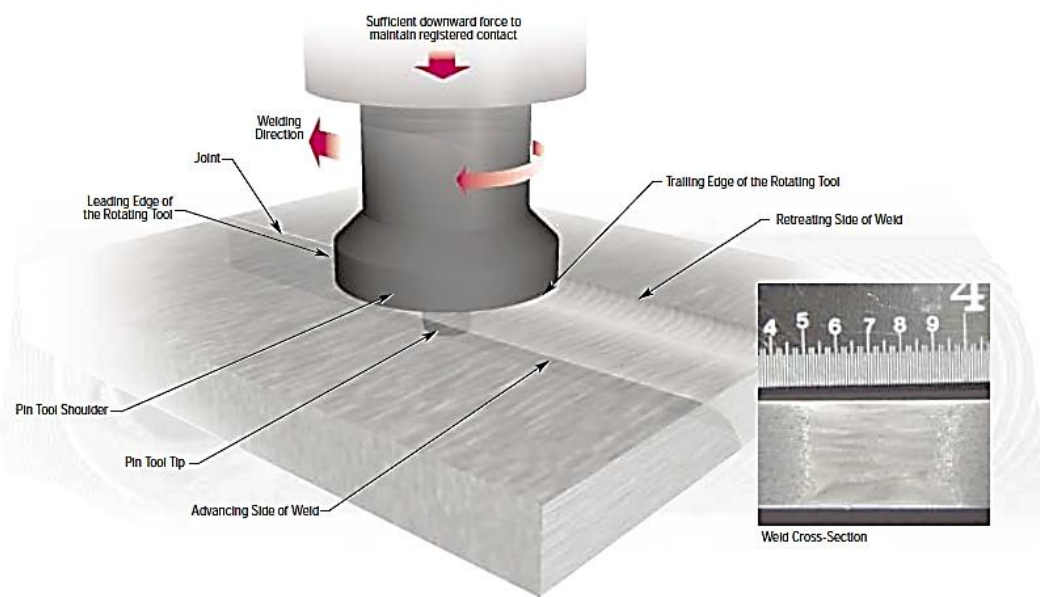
FSW depicting the sides of the weld and an in depth view of the pin in the work piece
